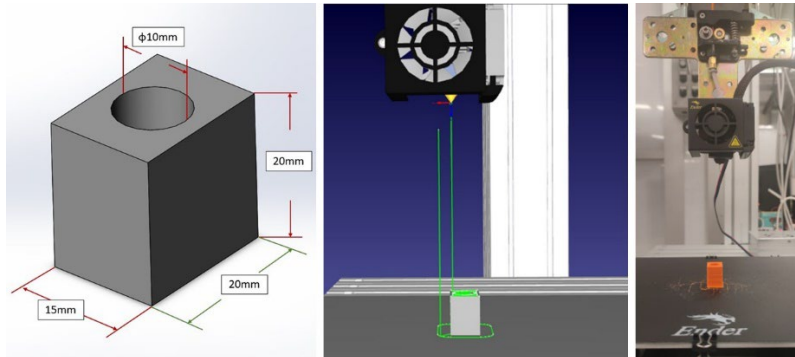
Case B: CAD model of the workpiece with dimensions (left), CAD model of the workstation (middle), and printed box with a hole (right).
